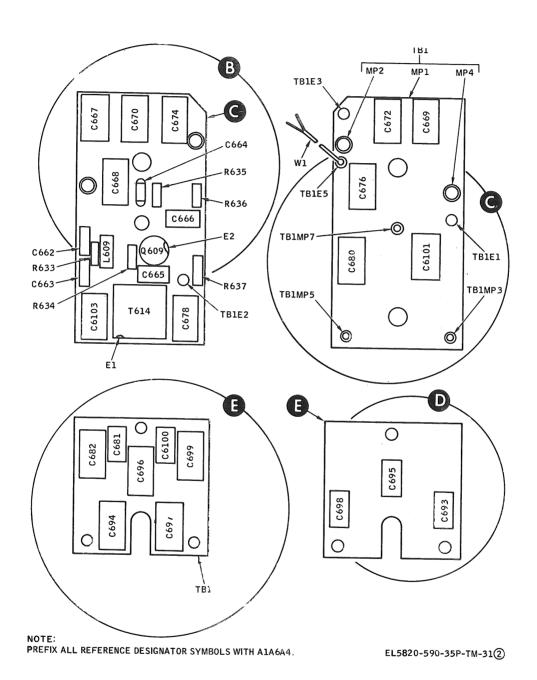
Frequency synthesizer module, component boards 1 and 2.
